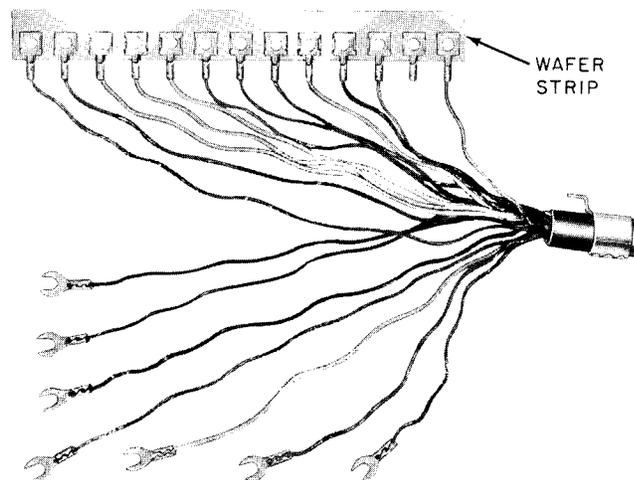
Non-slotted Wafer Strip End of Mounting Cord, Early Type
